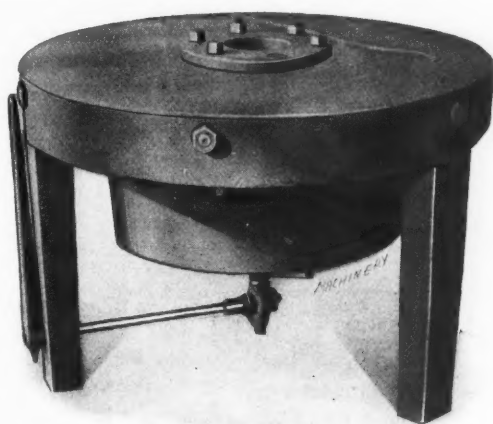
Cleveland Crane & Engineering Co.'s Press equipped for pressing Band on Shell
